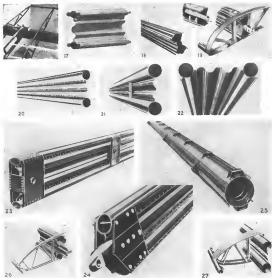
shows an end fitting on one of the heavier type spars with a similar one of inner tubes and side plates.
